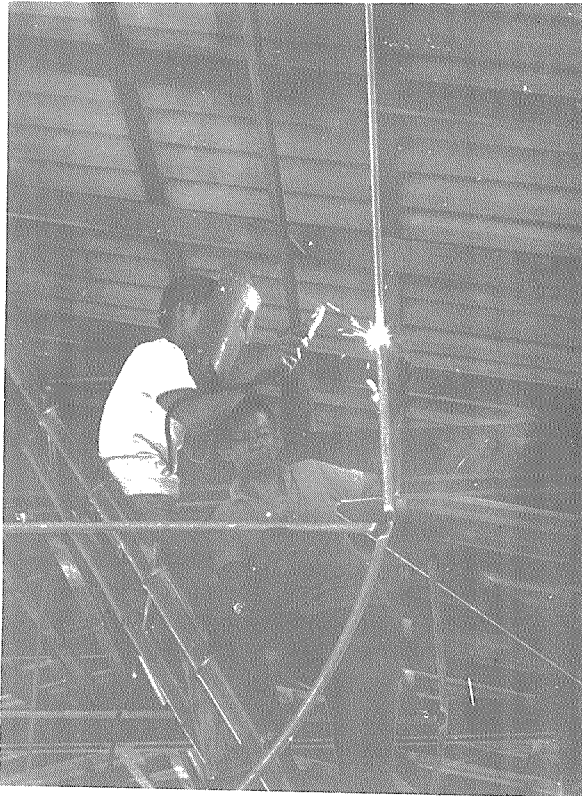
Welding a support brace from the head of a frame to the roof.
